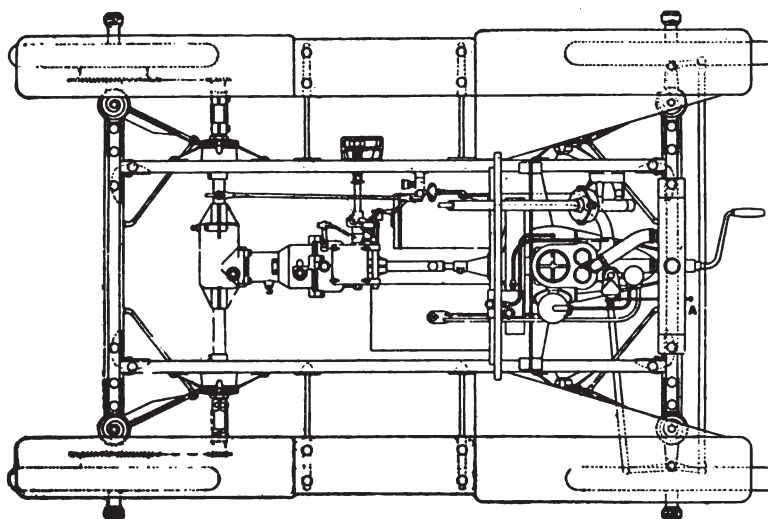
Plan of the Brush Runabout chassis, showing the location of the engine in a vertical position under the hood at the front, also the arrangement of the special planetary change speed gear case operated by side lever, and also the jack shaft with side chains to the rear wheels. The wheel base is 74 inches, with either 56 or 60-inch tread, as desired. The frame as well as the axles are wood. The car is geared for about twenty miles an hour at 1500 revolutions of the engine, if fitted with solid tires, and about 25 miles an hour at the same engine speed when supplied with pneumatics, solid tires being recommended by the makers when the average running speed is less than 15 miles an hour and over soft or muddy roads.
